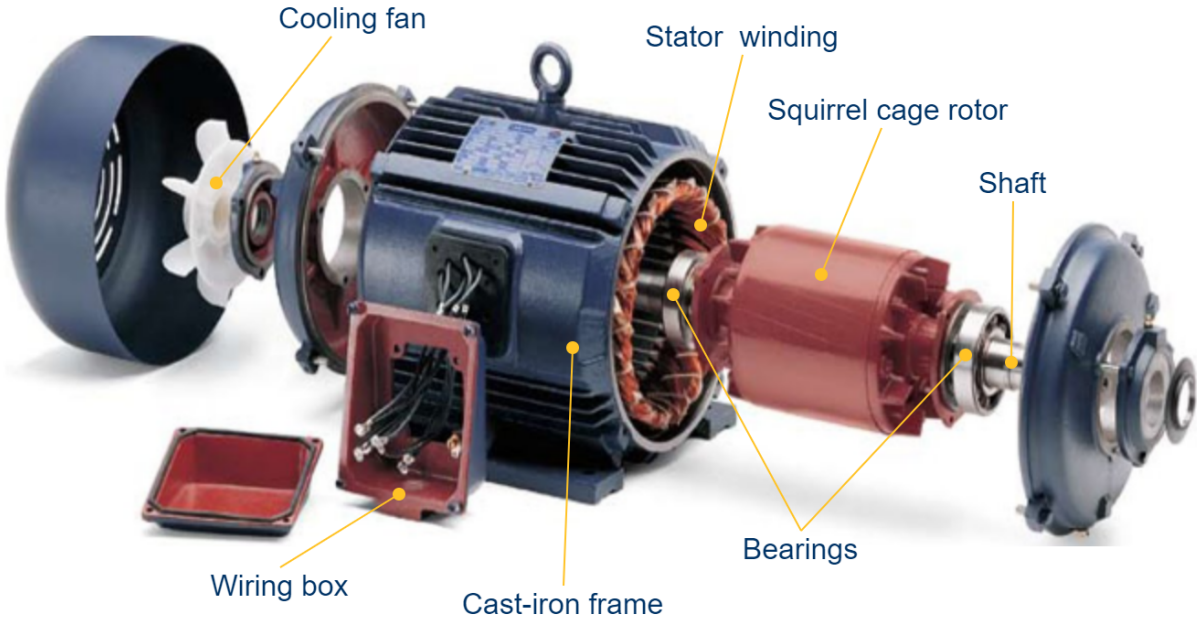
REF REF REF REF Exploded view of a squirrel cage induction machine
